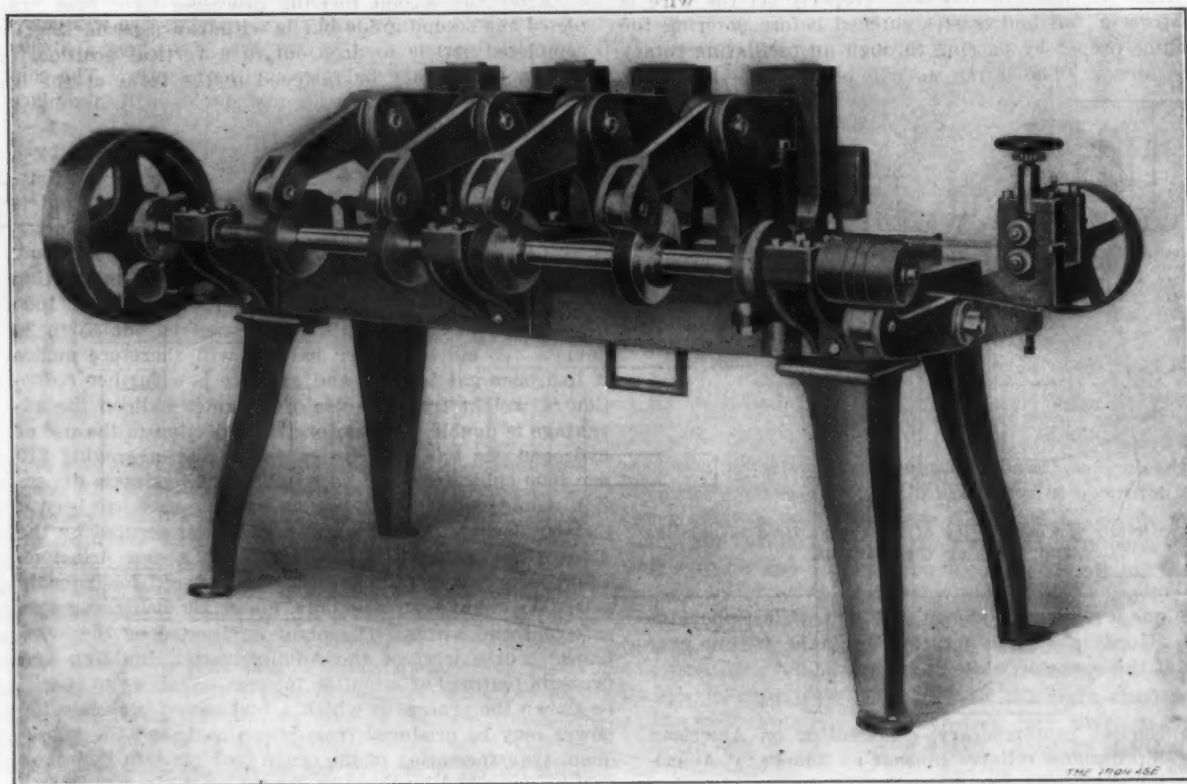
Rear View, Showing Principally the Cam Mechanism.
